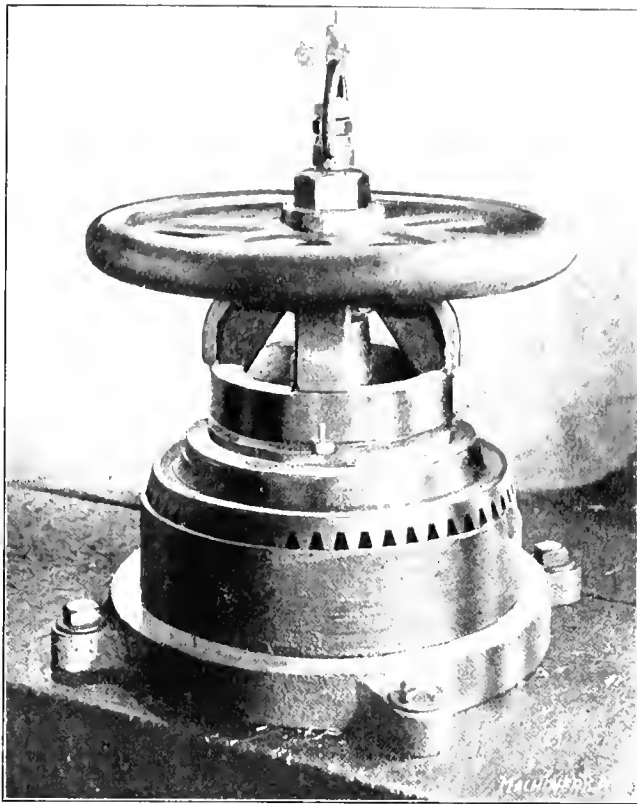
A Convenient Fixture for Assembling the Gears on the Gear Case
